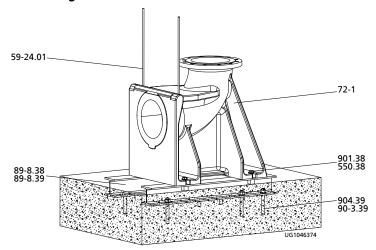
Fastening the duckfoot bend with foundation rails and anchor bolts
